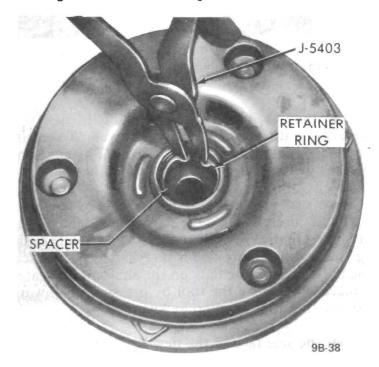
B-43 - Removing or Installing Retainer Ring in Clutch Drive Plate
